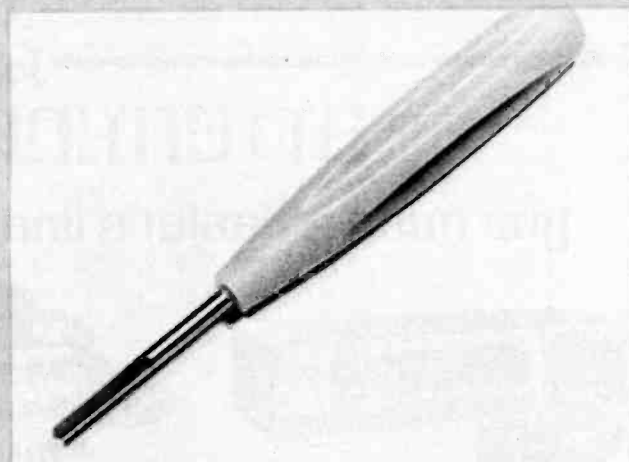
A spot cutter sold by Vero for cutting the copper track to break the circuit.
